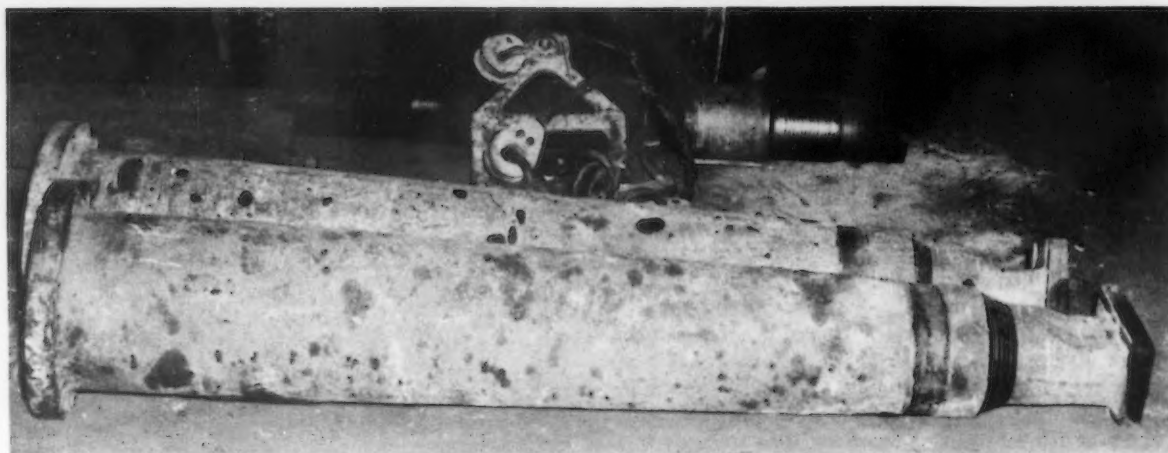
Openhearth charging machine peels frequently break off in service. Automatic welding has reduced the repair time from about 8 hr to 2 hr.
